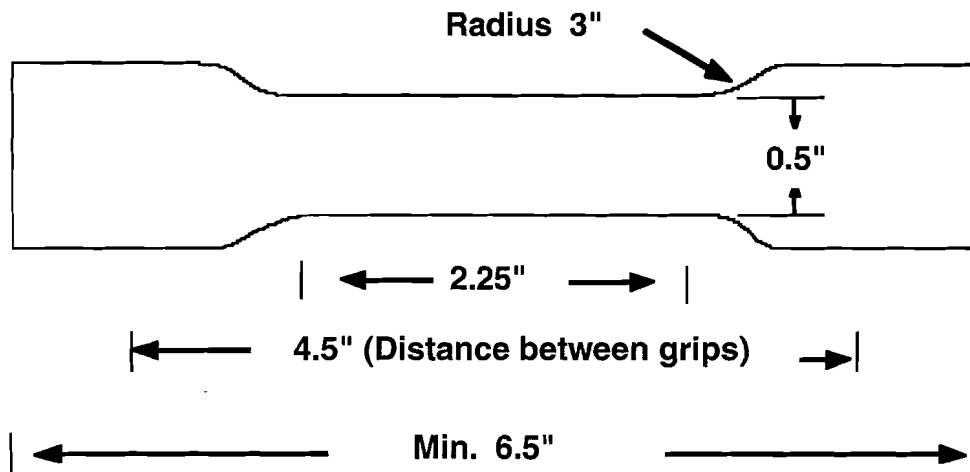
The dumbbell-shaped test specimen for the ASTM D638 tensile test method.
